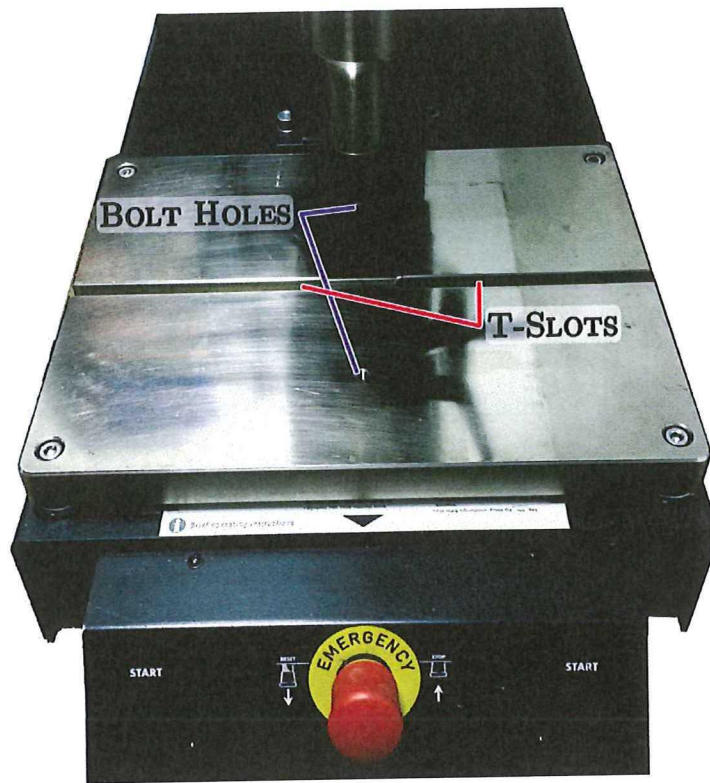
| Baseplate of the USW-machine showing the bolt holes and T-slots
